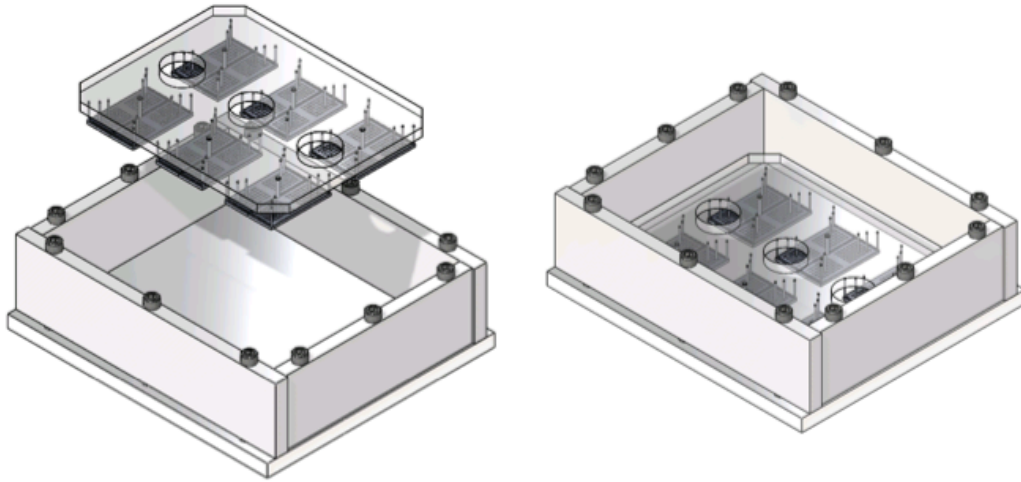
Mold Masters and Locating Plate, Outside and Inside Mold Box
